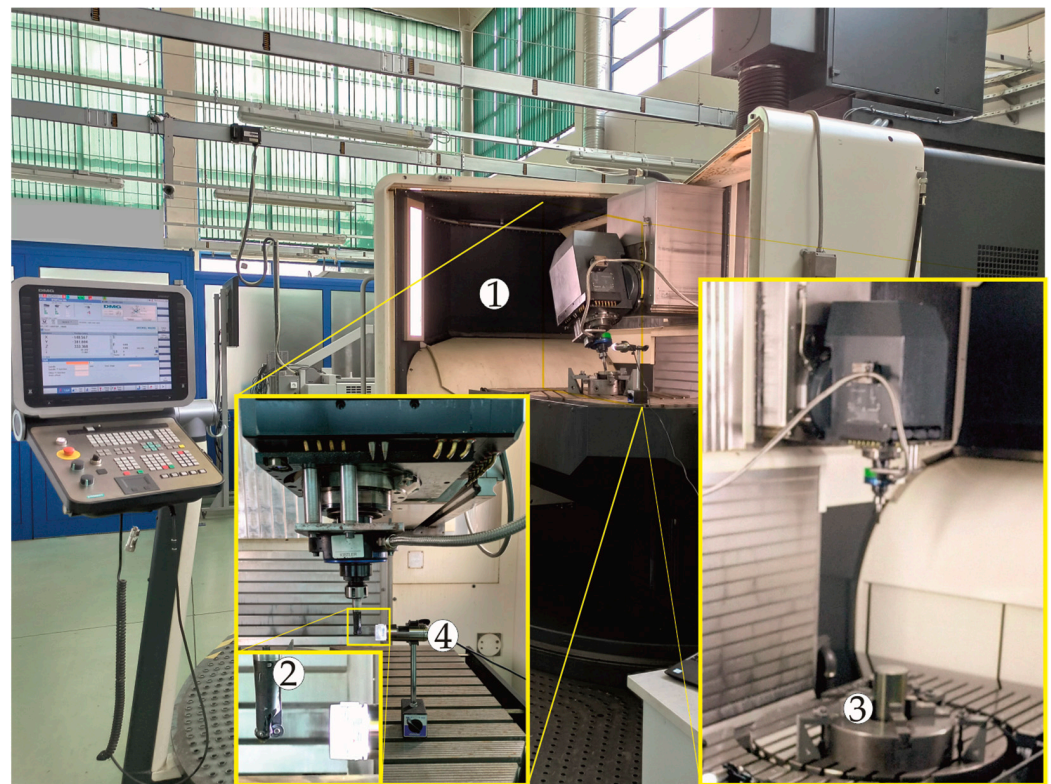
Experimental test bench (1. Machining tool, 2. Torus milling cutter, 3. Workpiece, 4. Dino-Lite 7000 CE series digital workshop microscope).
